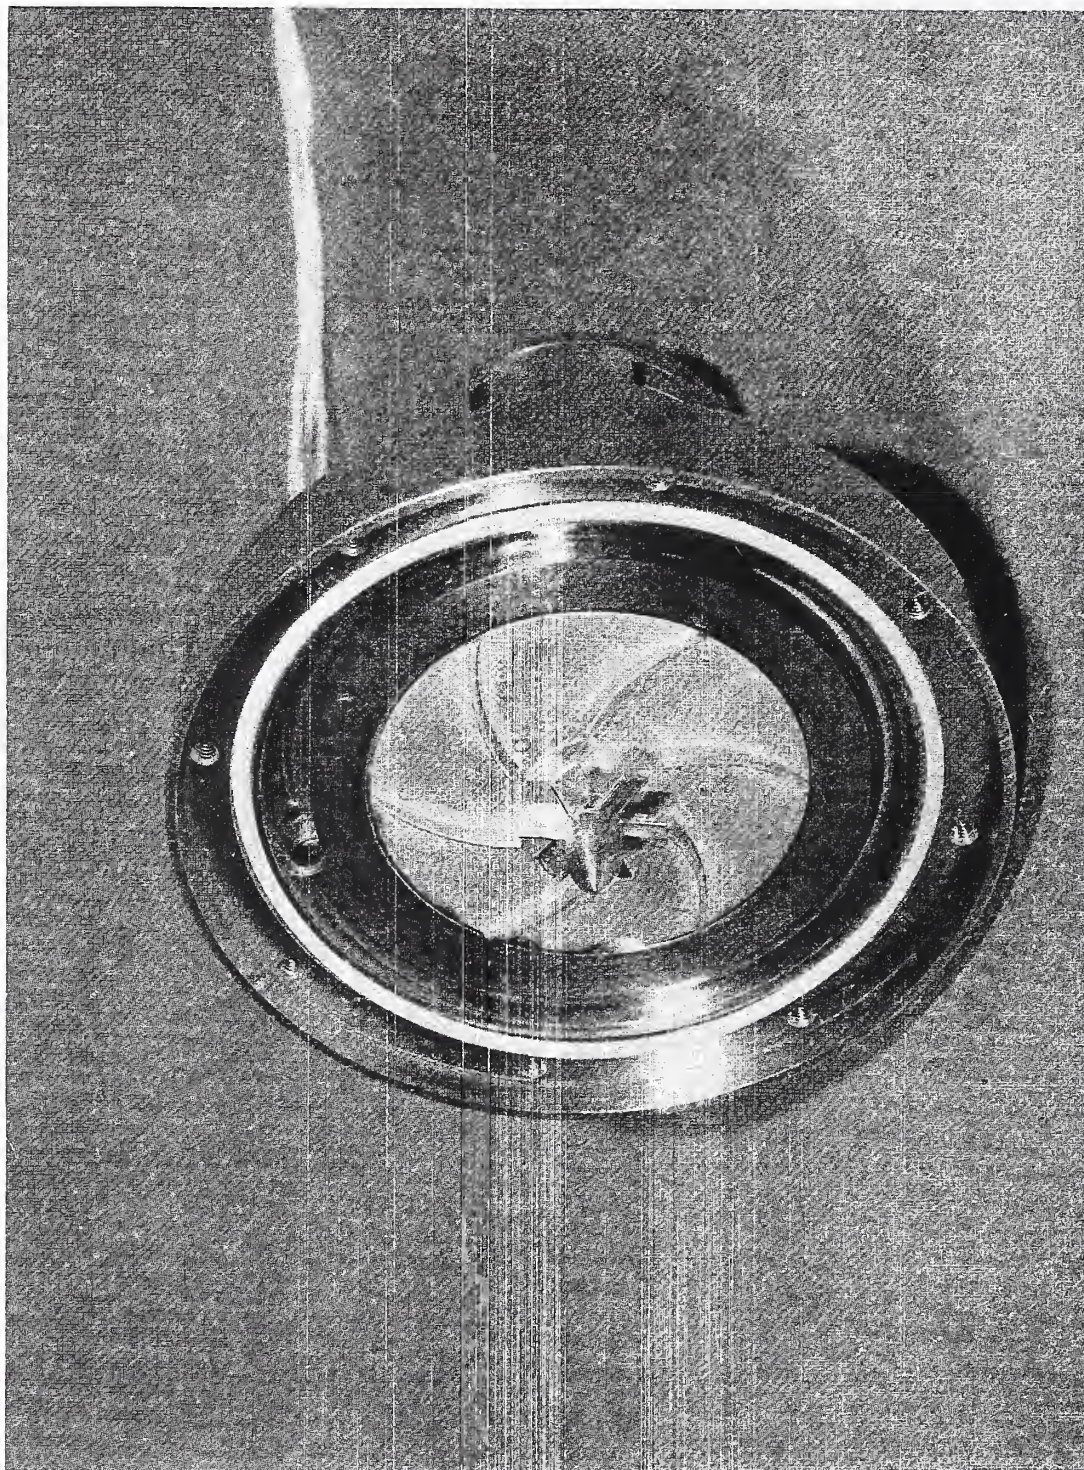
Photo, pump inducer, impeller, and vaneless diffuser.
